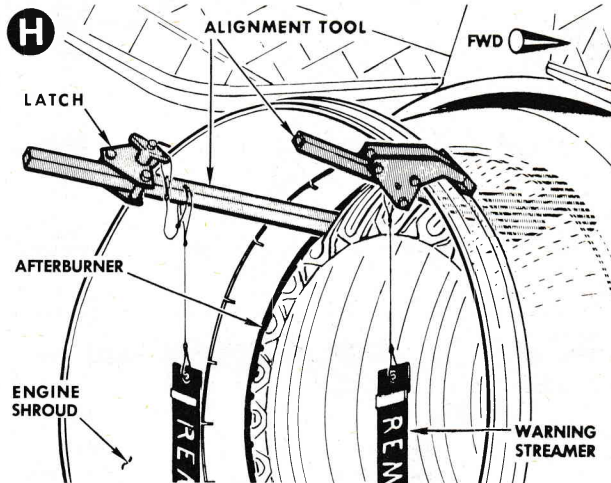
Replacement, Engine Shroud Using Stand SE 1012-803 (Sheet 2 of 3)
